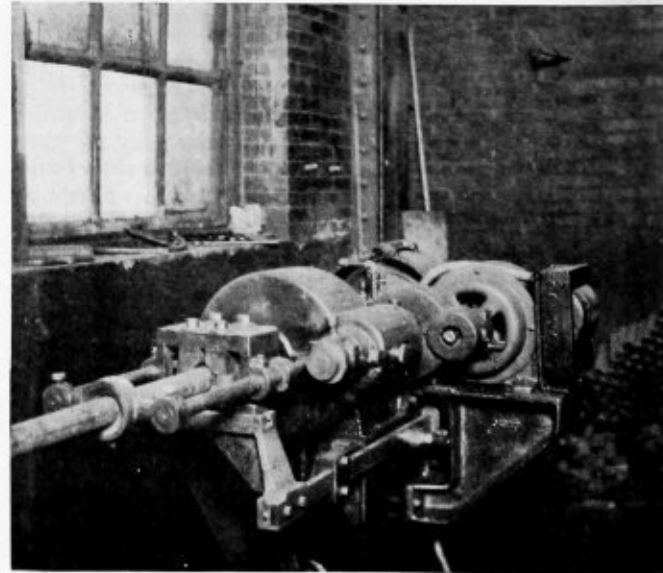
Automatic Safe End Cutting Off Machine, with Safe End Storage Shown Adjacent to Machine
